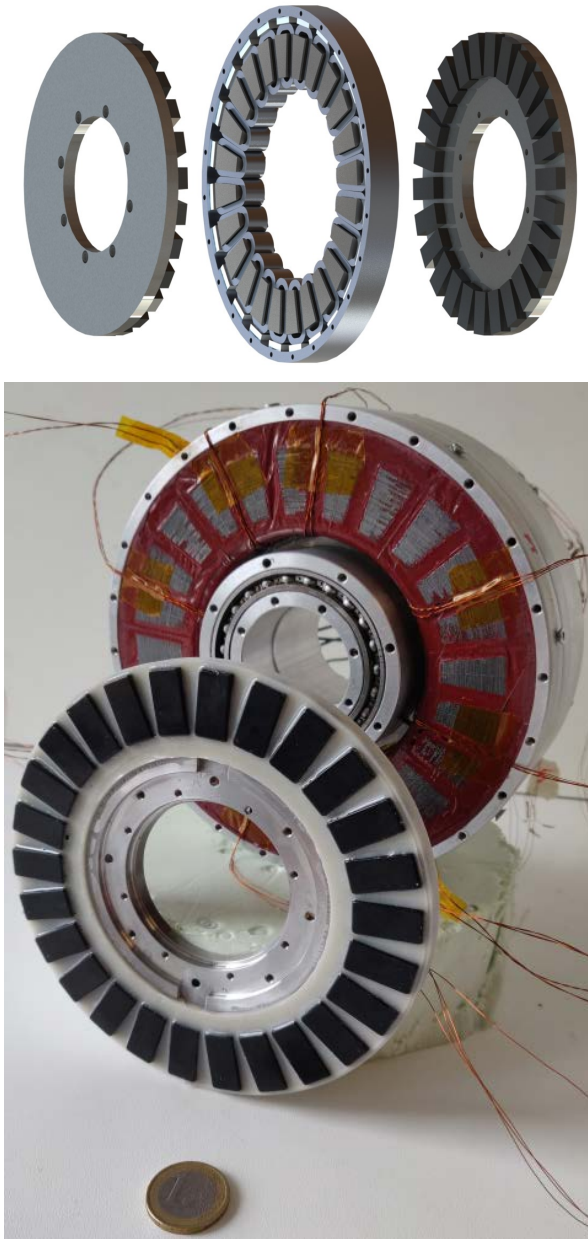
(a) CAD drawing of the test case YASA AFPMSM (b) Assembled prototype stator and rotor, both enamelled copper wire and anodized aluminum foil stator look identical after epoxy impregnation
